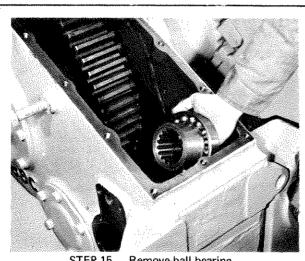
Removal and Disassembly of Bevel Gear Shaft Assembly (Sheet 2 of 3)
